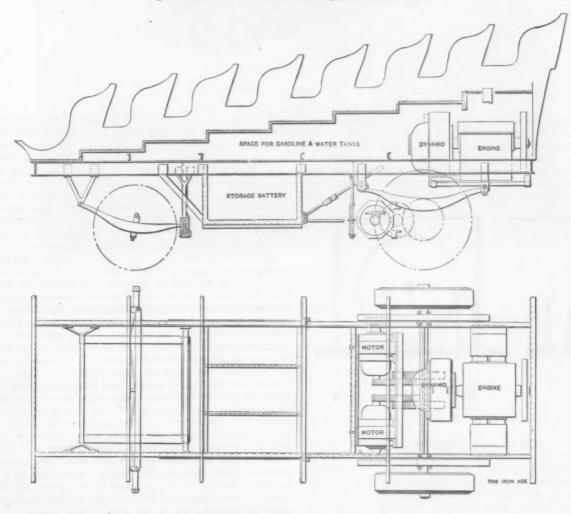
Elevation and Plan, Showing the Arrangement of the Parts.
